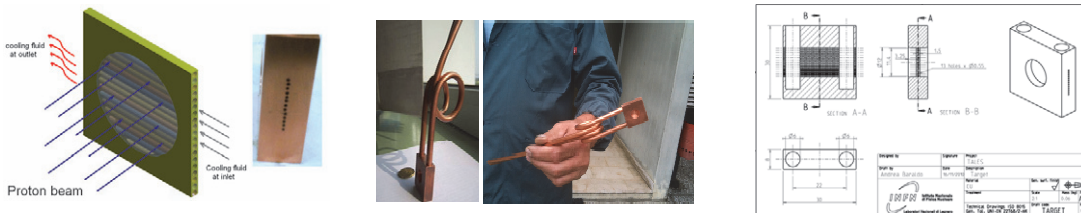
From left to right, target core concept, picture of the prototype showing the micro channels, picture of the assembled prototype compared with a coin, picture of the prototype showing the hole for lithium deposition and technical design of the target.
